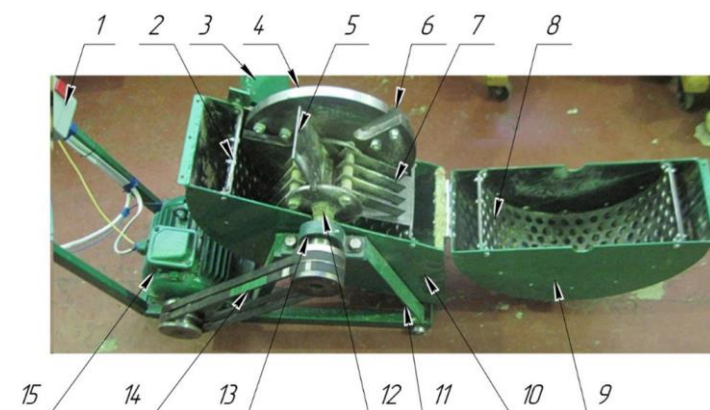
1-control panel; 2-fixing strip for screen; 3- charging hopper; 4-disc for fixing the blades; 5-fan blades; 6-cutting blade; 7-grinding hammers; 8-screen; 9-upper housing; 10-lower housing; 11-frame; 12-working shaft; 13-support bearing; 14 - V-belt transmission; 15-electric motor [2]
